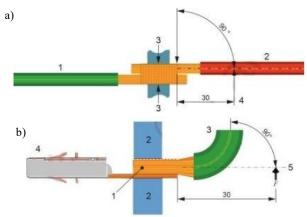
Schematic bending test setup: a) fixed splice between two wires (1 - first wire, 2 - second wire, 3 - fixation, 4 - actuation point); b) fixed welded package between wire and metal terminal (1 - weld package, 2 - fixation, 3 - wire, 4 - metal terminal, 5 actuation point).
